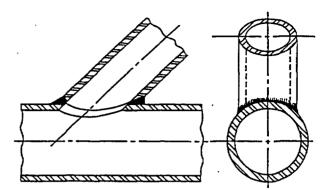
(C) TYPICAL WELDED ANGULAR BRANCH CONNECTION WITHOUT ADDITIONAL REINFORCEMENT
